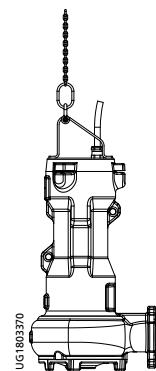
Fastening the claw for twin guide rail arrangement
